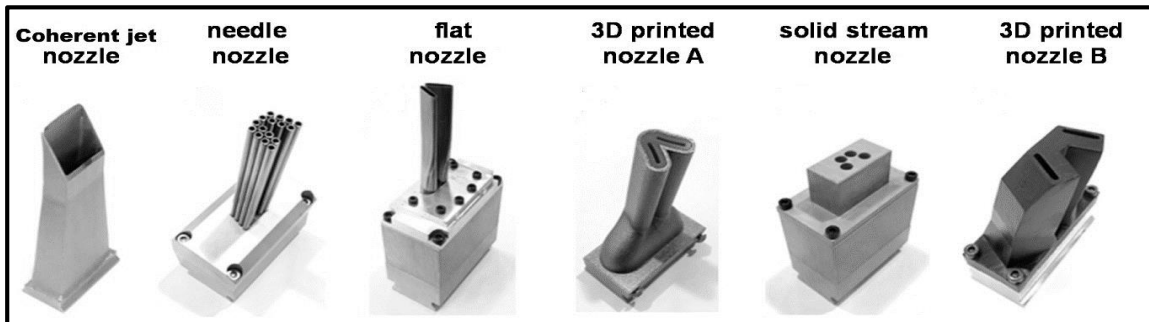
Various designs of cutting fluid supply nozzles in grinding operations [28]
